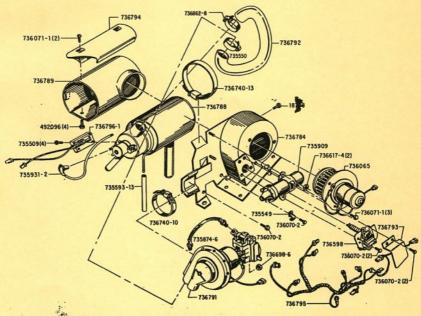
HEATER ASSEMBLY 736783 USED ON KIT 8345-B
